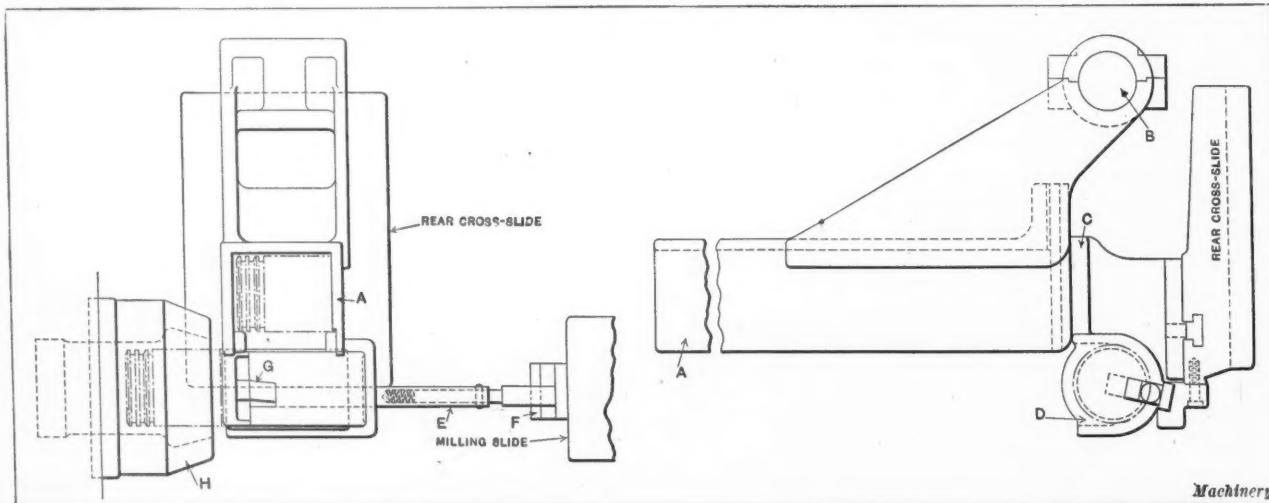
Arrangement of Mechanism of the Feeding Magazine shown on the Machine in Fig. 6
